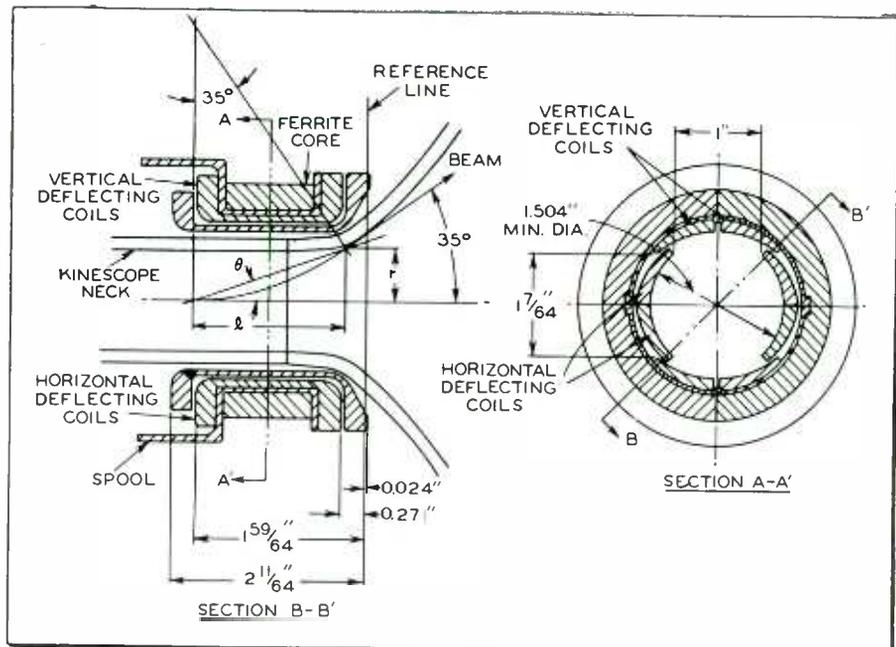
Diagram providing a cross-sectional view of the yoke coil assembly
